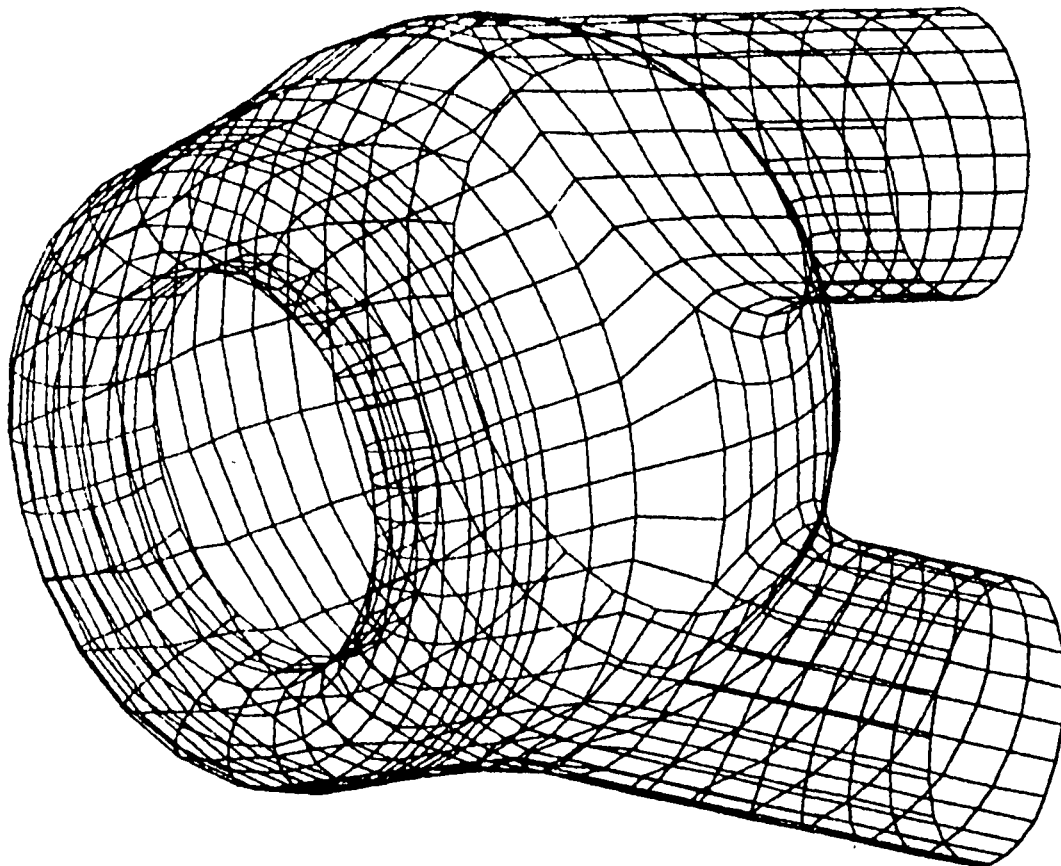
DFNUS HGM Nominal Outside Wall Grid
